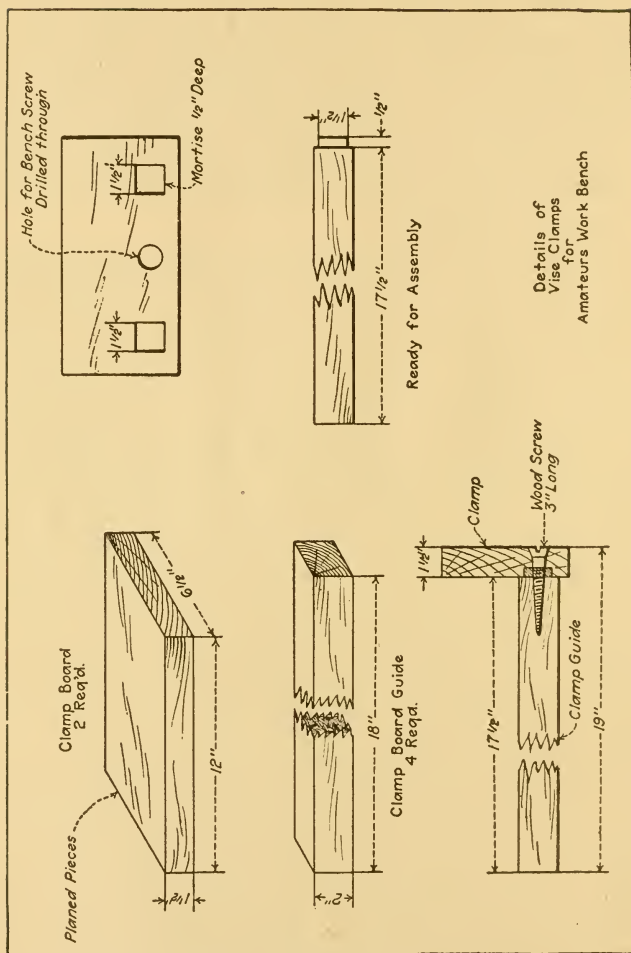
Details of Vise Clamp Design for Home Workshop Bench.
